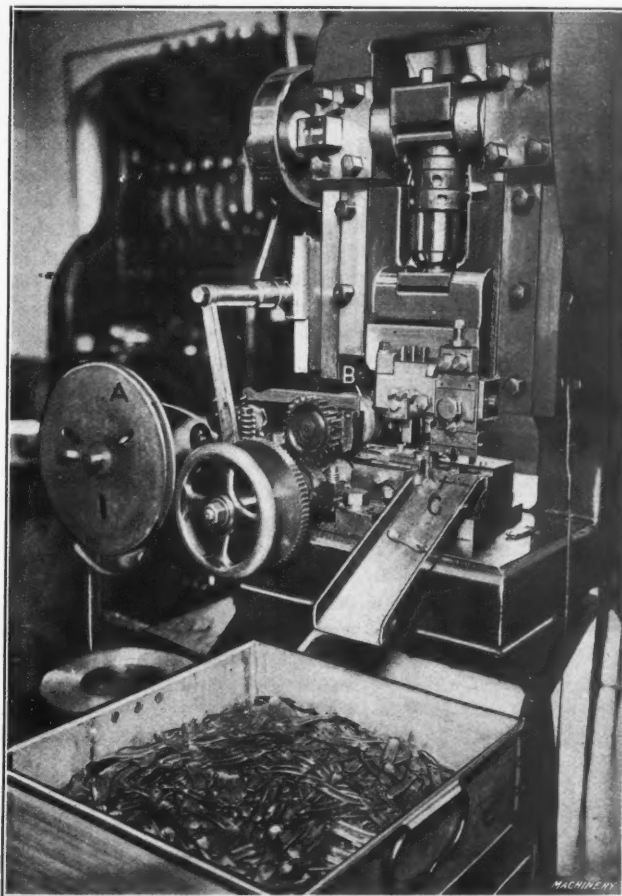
A Machine used for making the Springs used in Cartridge Clips
